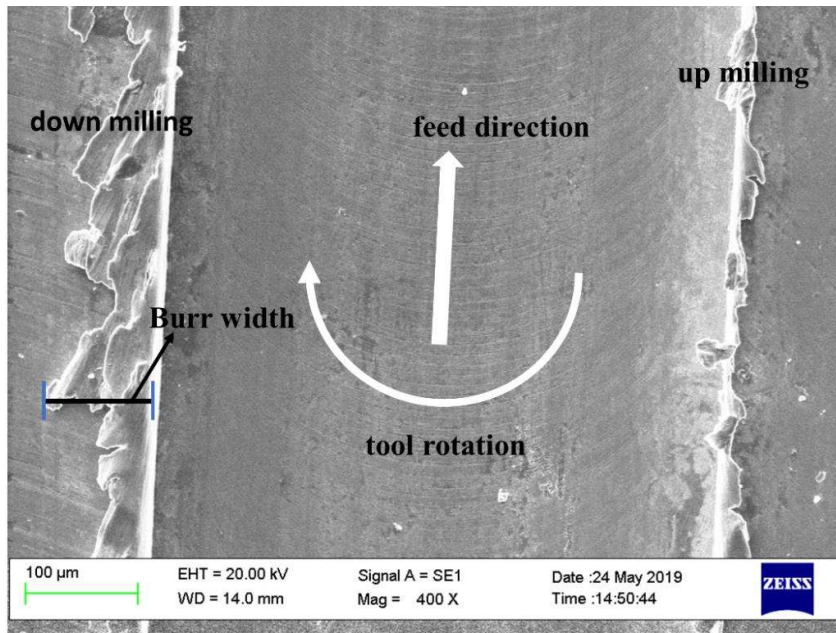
Micro-channel made by the uncoated WC tool in dry condition showing the workpiece feed direction, down milling and up milling sides, and burr width measurement
